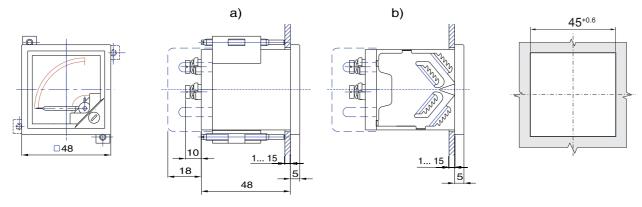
External dimensions of MA16 meters a) with screw holders b) with spring holders
